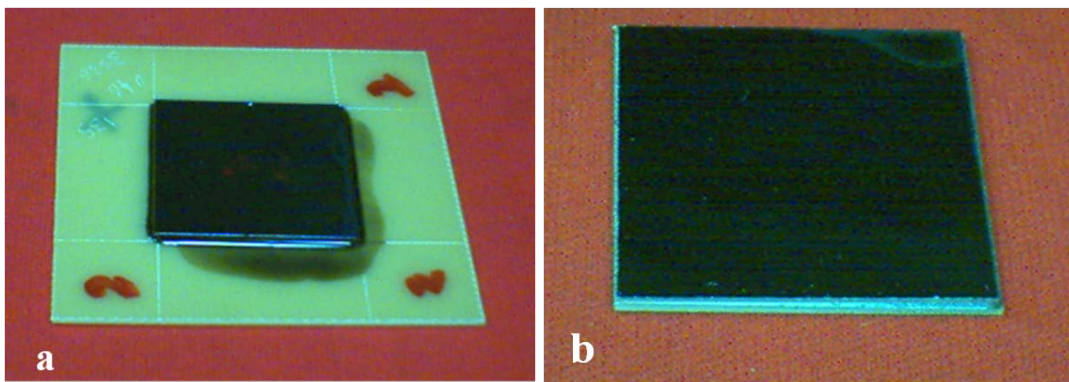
Typical trilayer sample: a) after manufacturing process, b) trilayer final shape.
